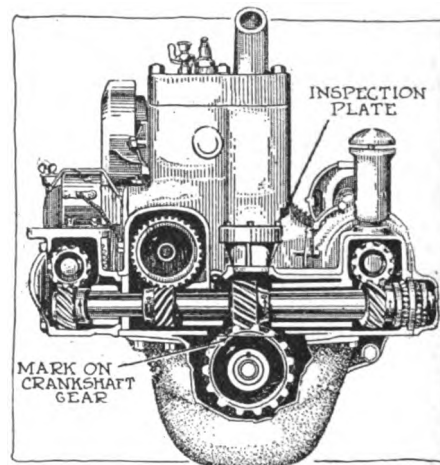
View of Overland six motor with timing gear case removed, showing mark on crankshaft gear for setting cross shaft which drives the magneto and generator
